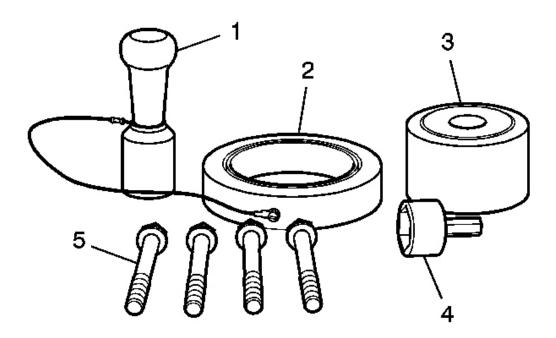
Cylinder Liner Trimming Tools View (2 Of 2) Courtesy of GENERAL MOTORS CORP.
